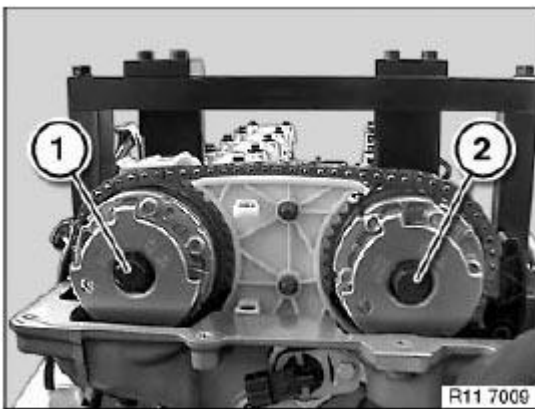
Identifying Inlet Camshaft Central Bolt And Screw
